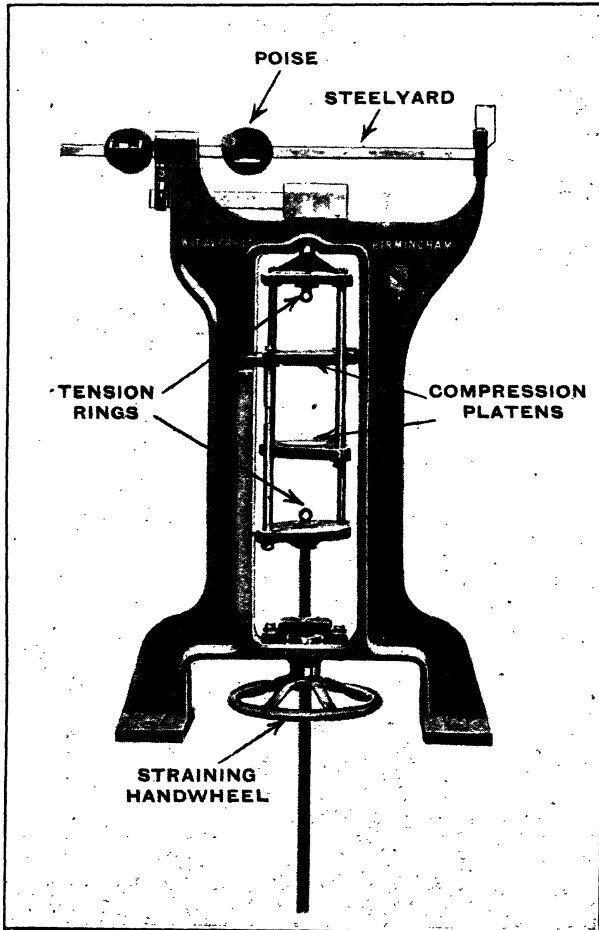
Hand-driven Machine for Testing Coil Springs in Tension and Compression.
